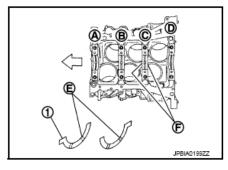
Identifying Thrust Bearing And Installation Position Courtesy of NISSAN NORTH AMERICA, INC.
